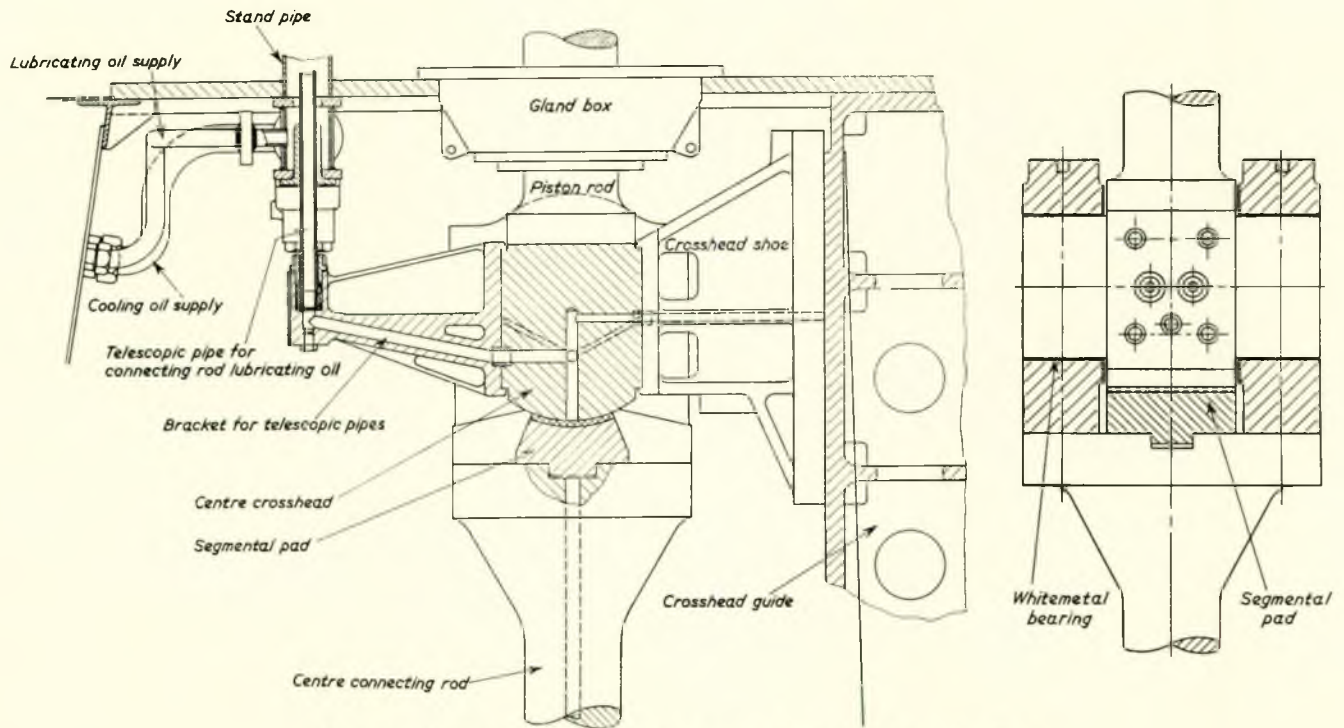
Centre top end with its pad, crosshead and shoe assembly
